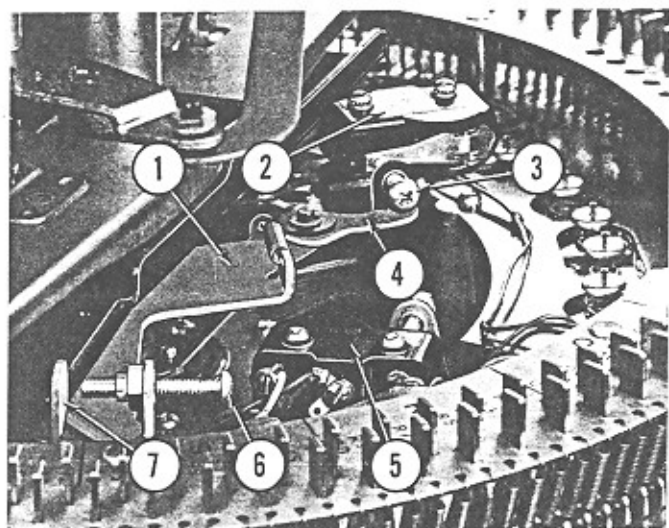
CARRIAGE SWITCH ADJUSTMENT
